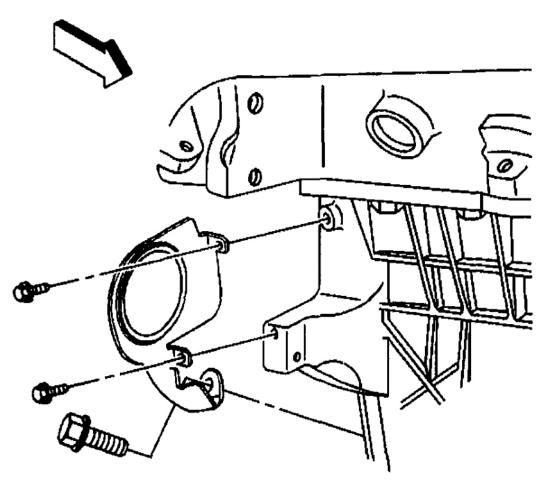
Identifying Oil Pan Skid Plate Courtesy of GENERAL MOTORS CORP.
